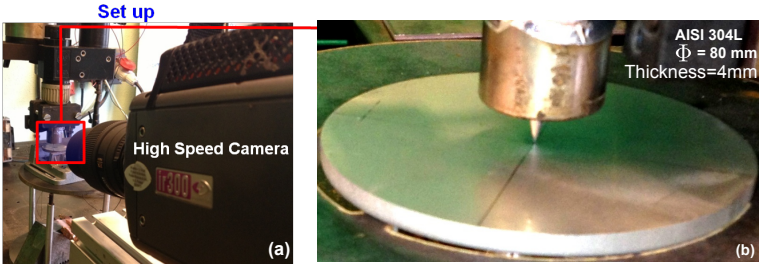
(a) Experimental setup for the Static GTAW Process (b) Close-up of the welding electrode and the AISI 304L stainless steel disc
